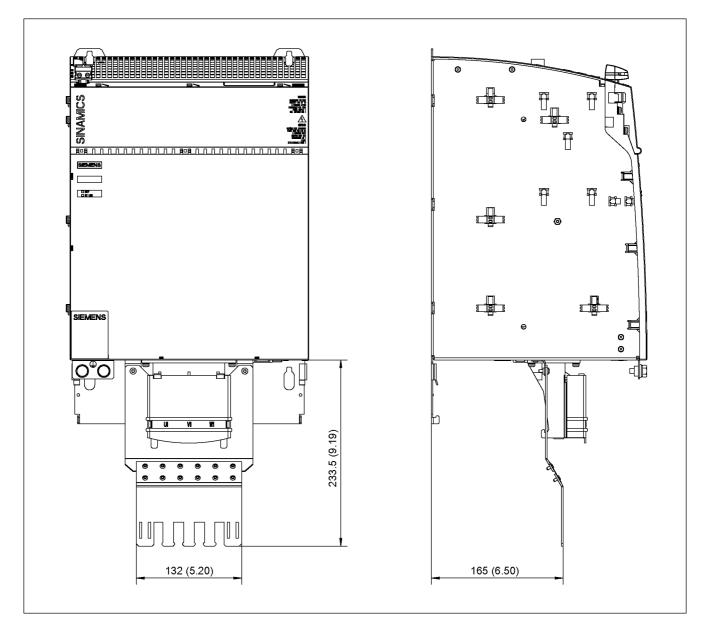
Dimension drawing of shielded terminal plate on a 300 mm module with internal air cooling
